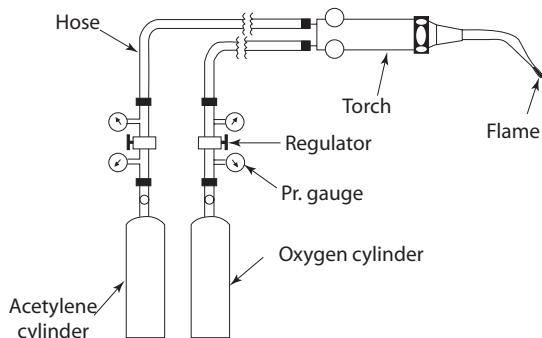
Oxy-acetylene welding circuit
